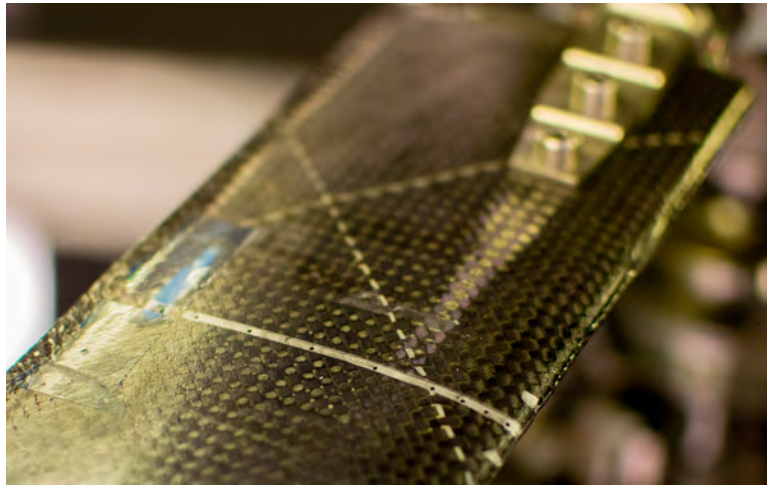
Finished blade with pre-cured skin bonded back to the core. The pressure port holes are visible along the silver line.
